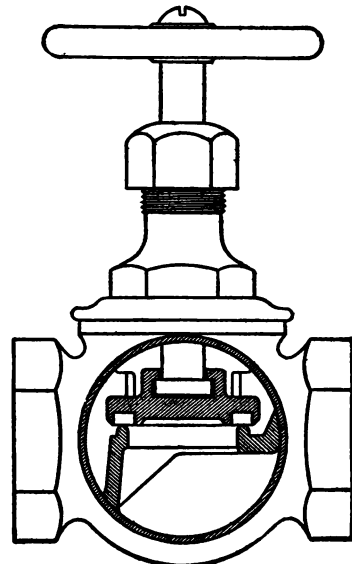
Globe Valve with Detachable Cap and Removable Interior Disc of Comparatively Soft Material to Insure Tightness.
